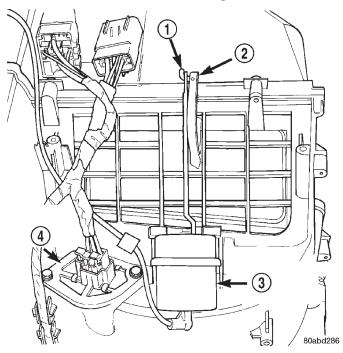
Recirculation Air Door Vacuum Actuator Remove/Install
